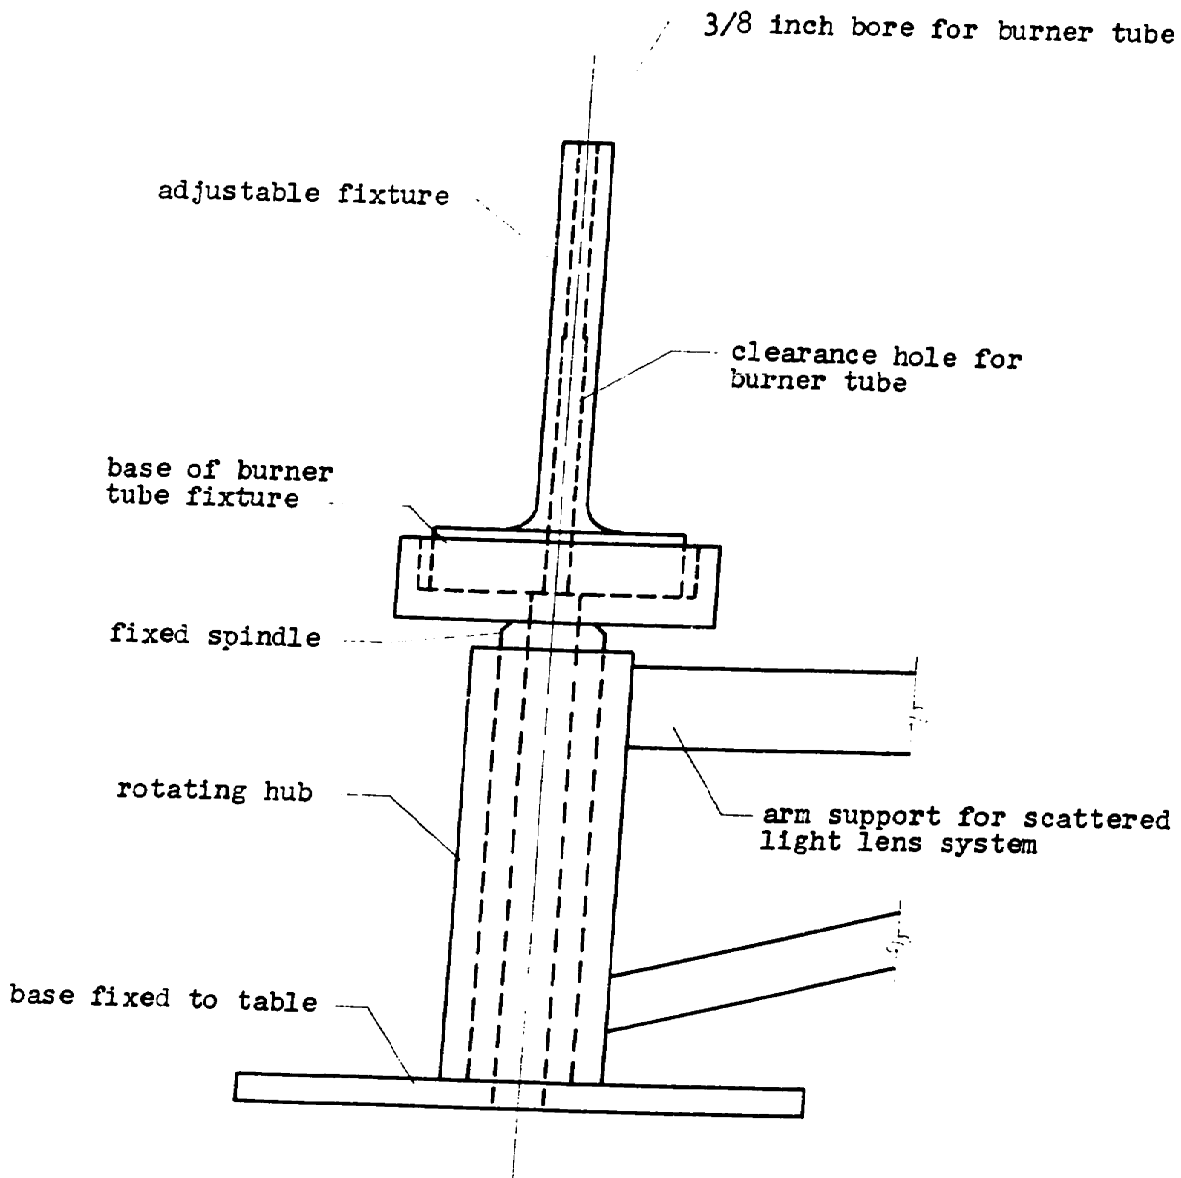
Burner tube fixture mounted on spindle of rotating arm system.
